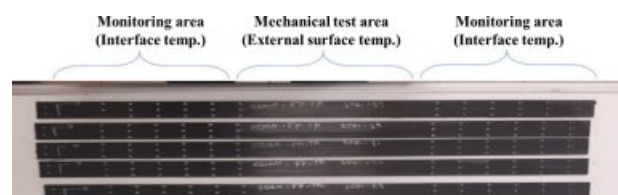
Digital photographs of induction heating welding specimen (Sample A)
